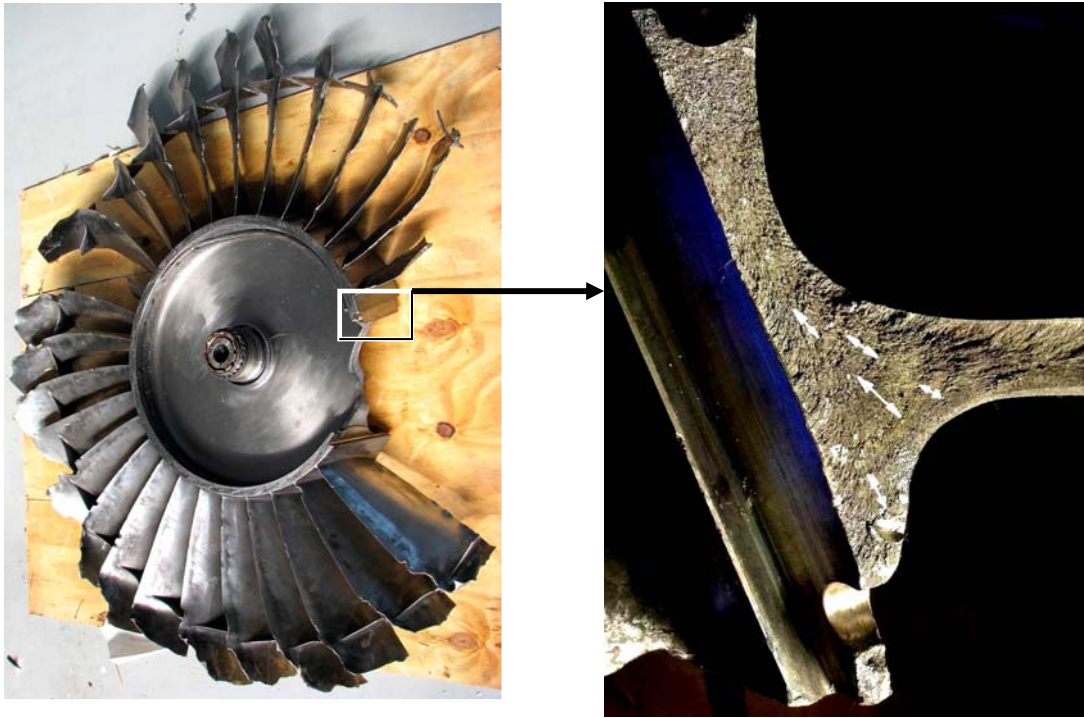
Overviews (a) of the failed disk of the first stage of LPC of engine D-30KU-154 and (b) its fracture surface. Arrows specify distances between macro-beach-marks of fatigue failure.
